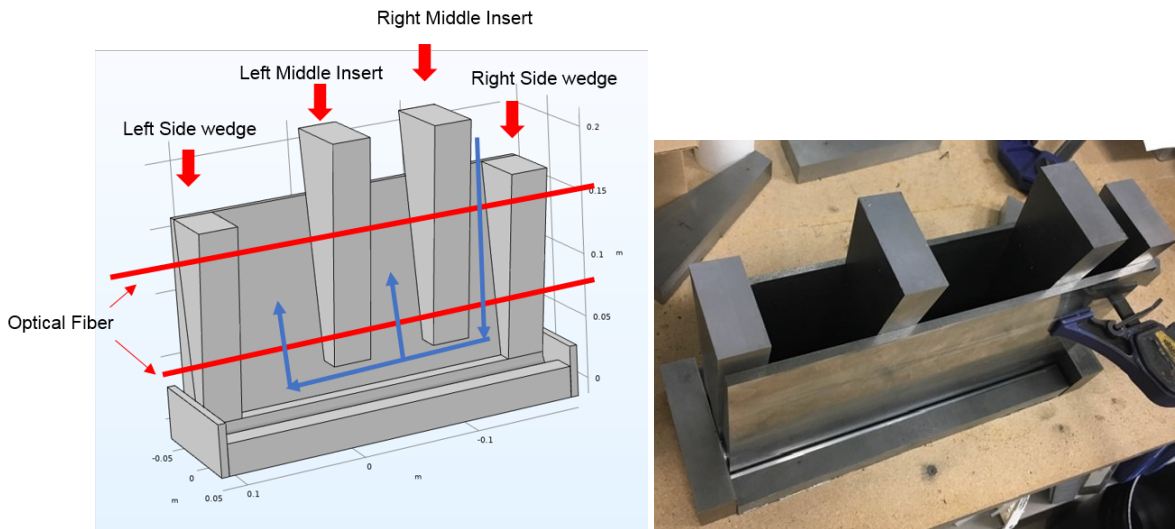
ACRC Wedge Mold: (Left) Individual Wedge Mold Components with blue arrows indicating metal flow during mold filling (Right) Assembled Wedge Mold.
